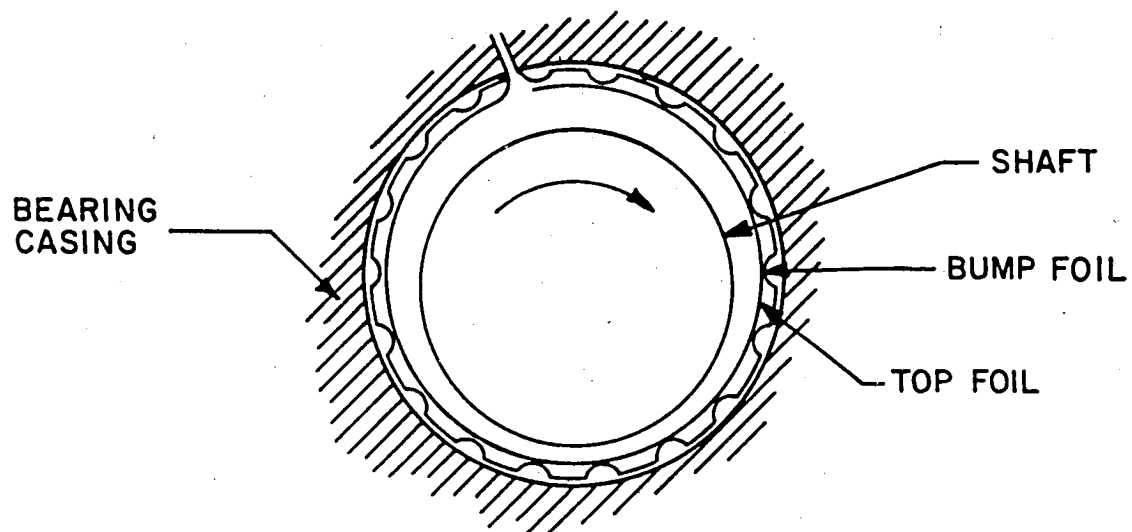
Basic Construction of a HYDRESIL Journal Bearing
